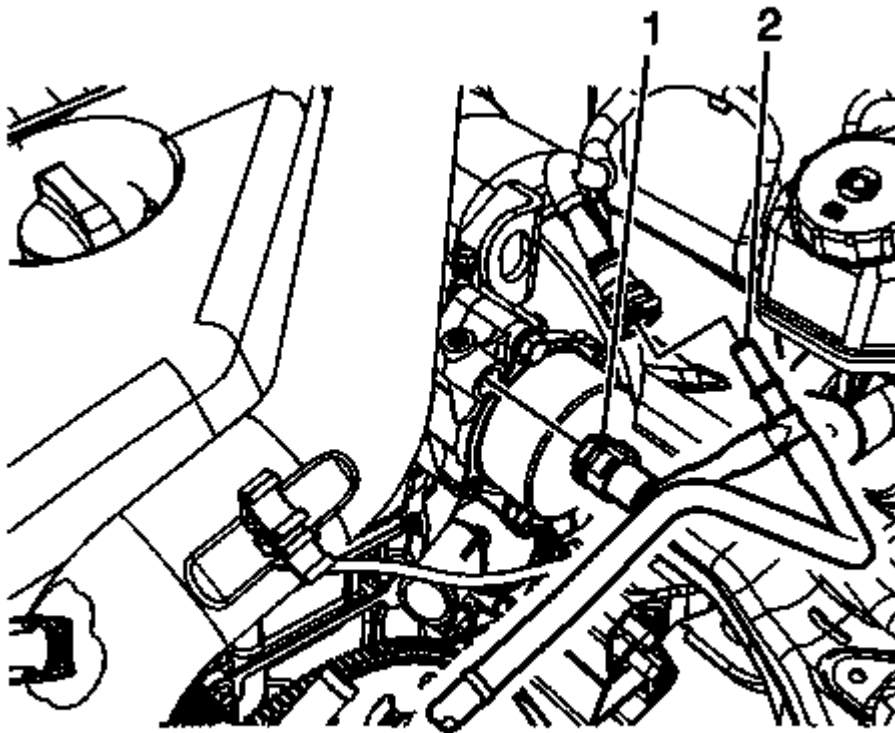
Power Brake Booster Vacuum Pipe Quick Connection
